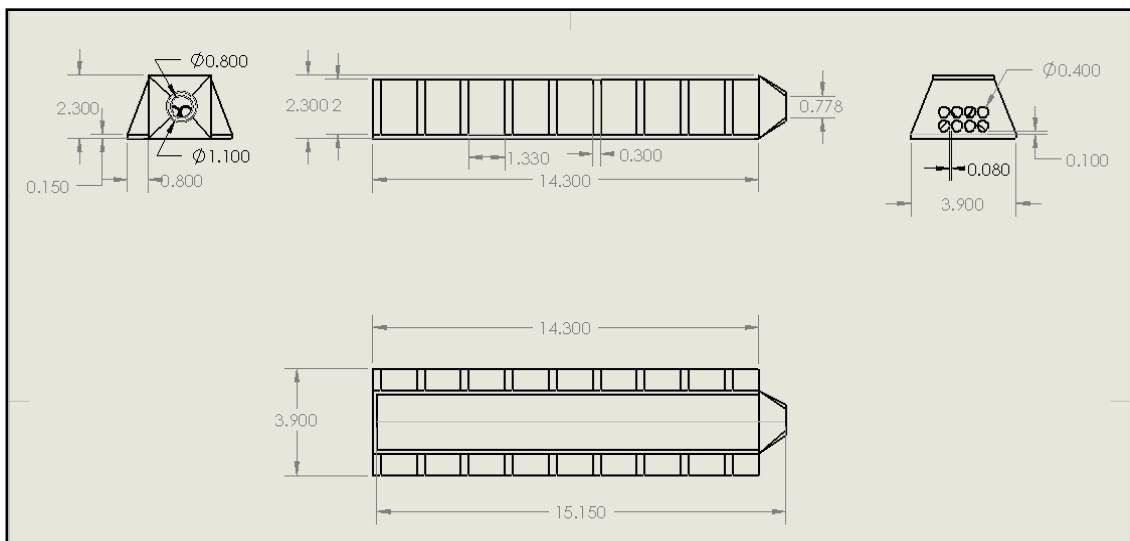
Single Tank Circular Diffuser Design 2D view
